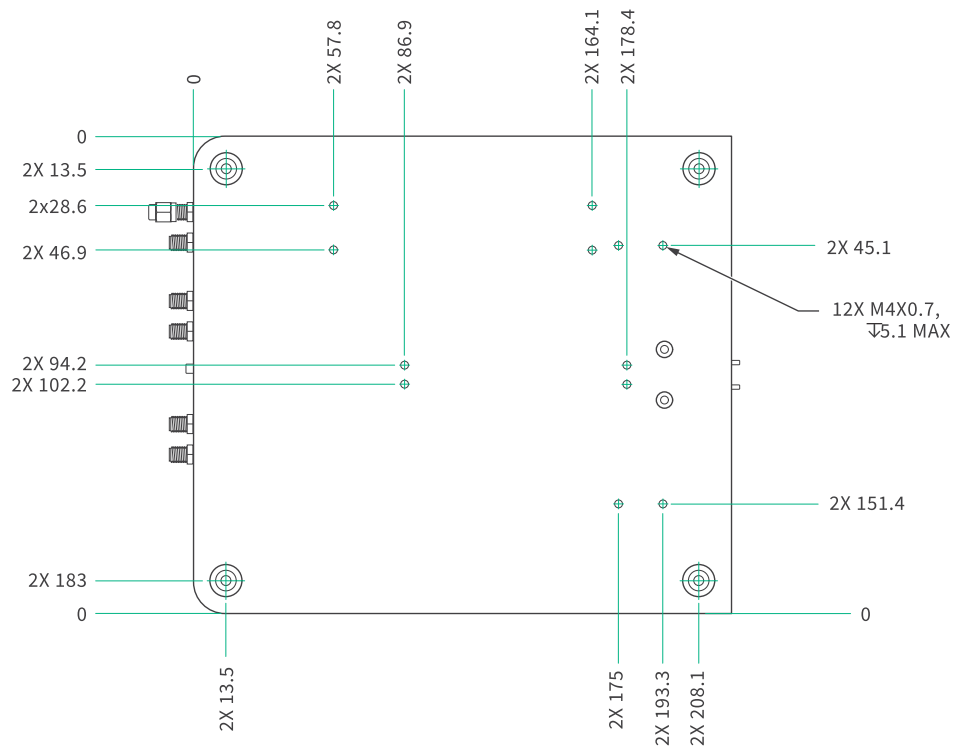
mmRH-5592 Mechanical Dimensions, Bottom View
